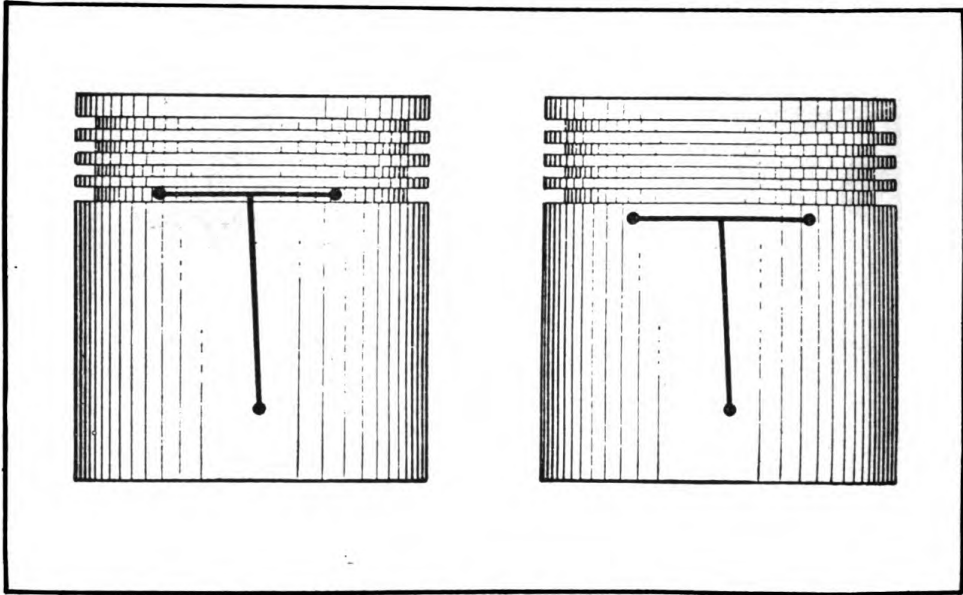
Types of T-slot pistons. Left-hand piston has horizontal slot behind lower oil ring, while right-hand piston has slot in piston skirt.
